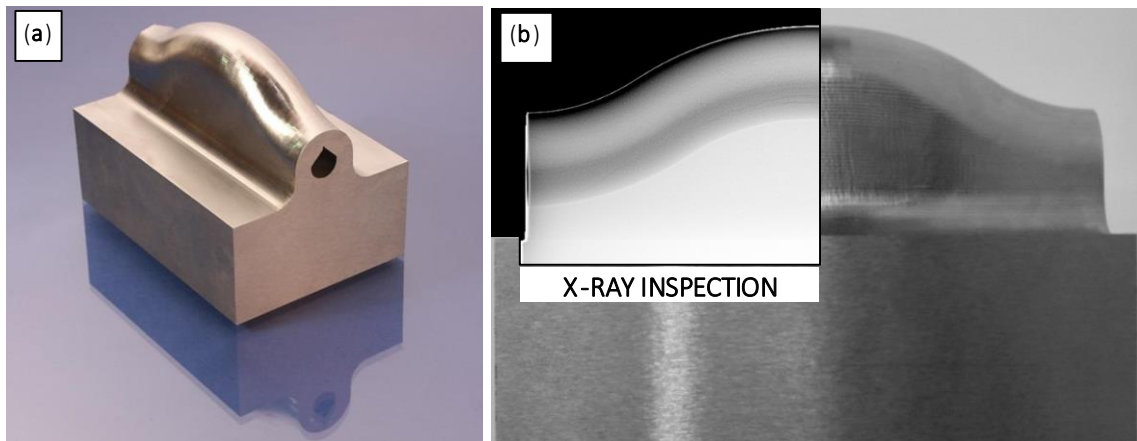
(a) Final part; (b) X-ray inspection.
